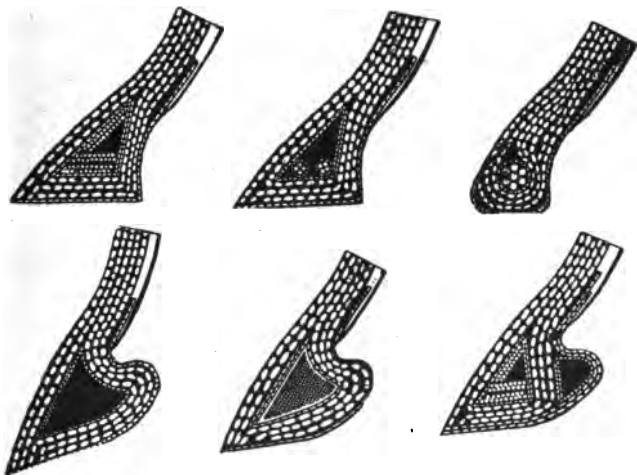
Construction of beads. Top, left to right—straight side; straight side with cable base; dunlap straight side with cable center. Bottom, left to right—soft bead clincher; hard bead quick detachable clincher; quick detachable clincher with false bead.
